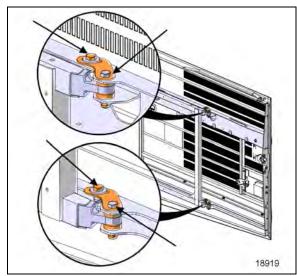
ARM TO DOOR ADJUSTMENT BOLTS
